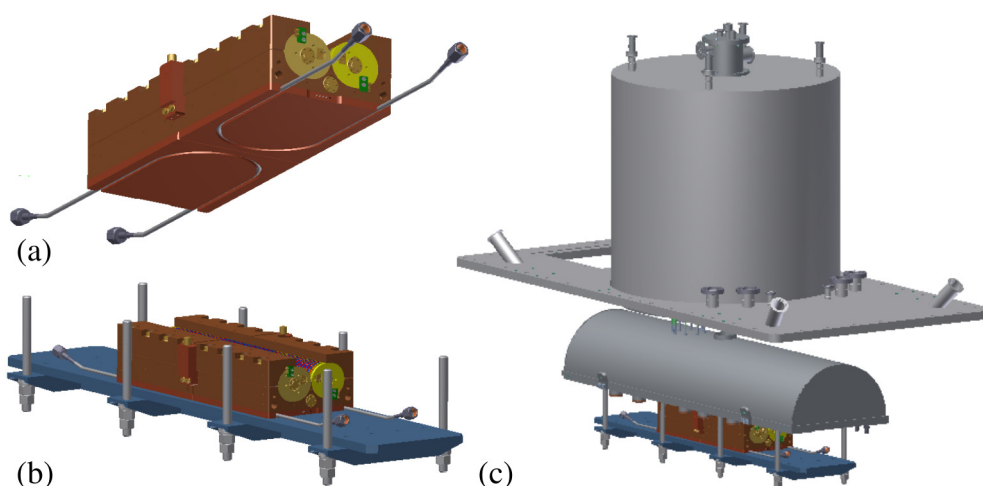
3D-view of the cryostat support assembly for the TGU40 [61]: (a) plate heat exchangers, (b) TGU40 support structure and (c) support structure inside the cryostat.
